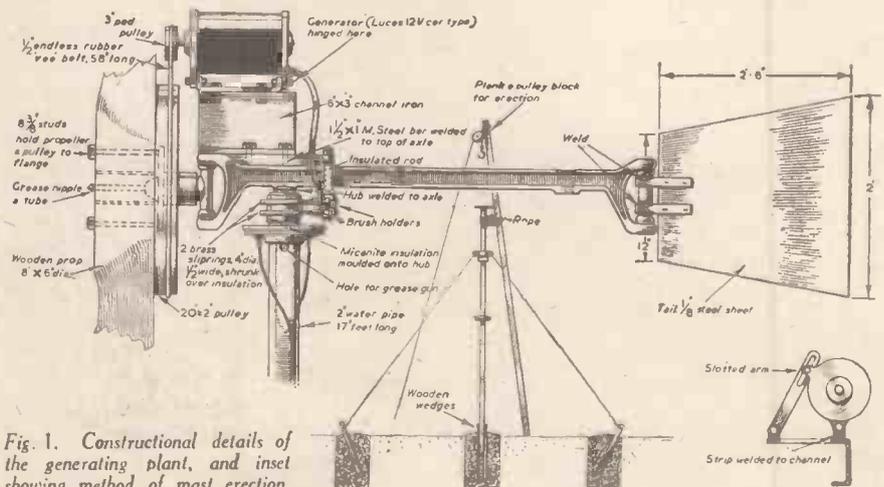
Constructional details of the generating plant, and inset showing method of mast erection.
